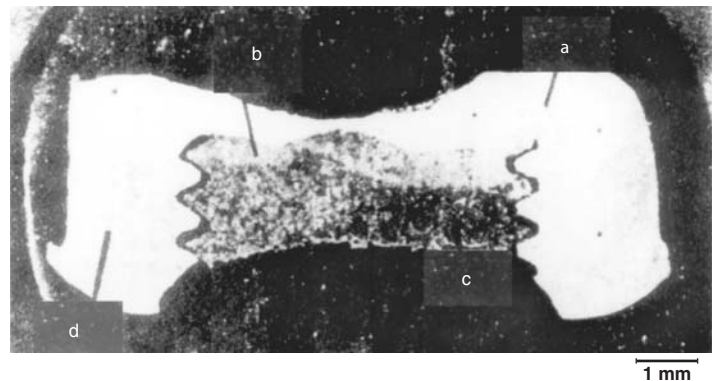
Polished and etched longitudinal section of a bolt-nut assembly. The bolt and nut are held together by very few threads.
